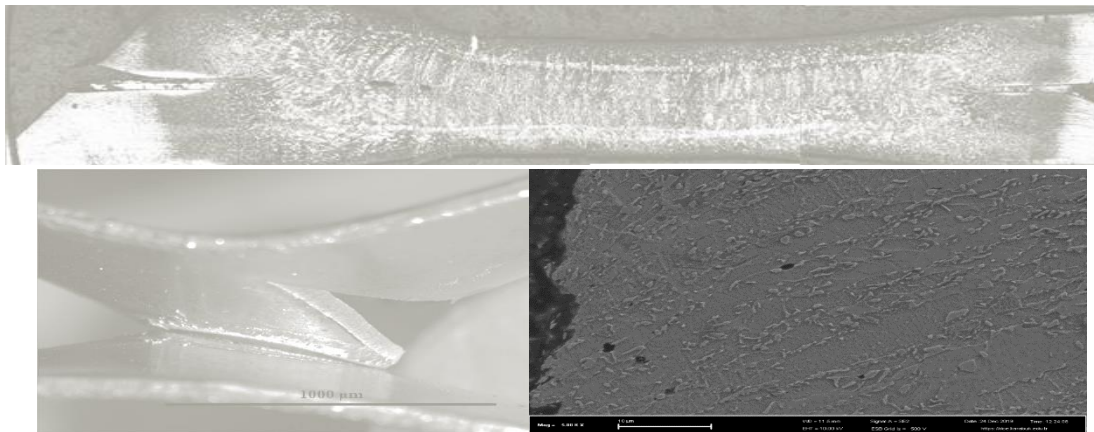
Failure mode in resistance spot welding for BM.
